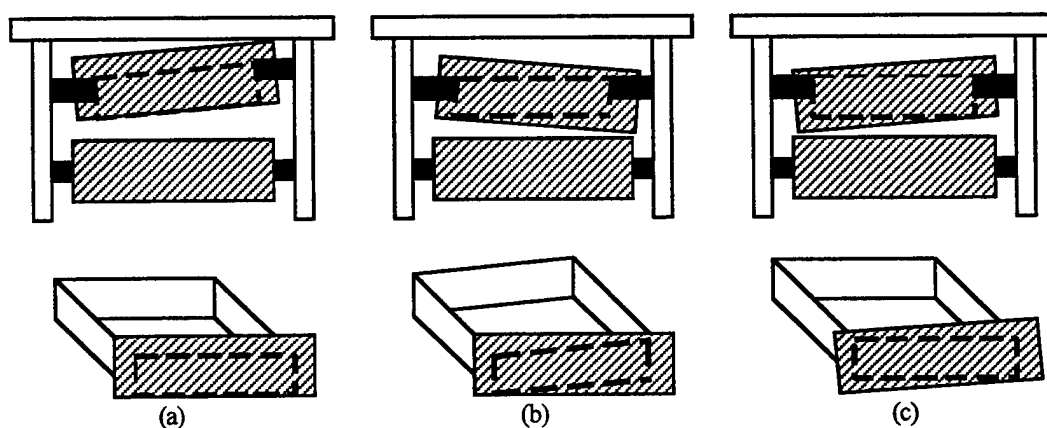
Three sources of poor drawer front alignment, a) slide misalignment with a properly constructed drawer, b) poor alignment of the drawer body, and c) poor alignment of the drawer front relative to the body even if the slides and drawer body are aligned. PKC #2 is affected by the first two but not the third.
